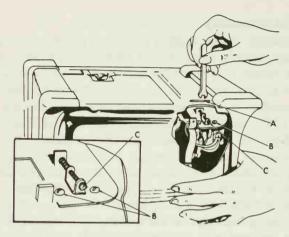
The time adjustment for this toaster is made by loosening two small screws (B) by one-half turn. Then, insert a 3/16-inch wrench into the opening (A), and engage the adjusting screw (C). Turn this screw toward the rear of the toaster for darker toast, toward the front for lighter toast. After the desired adjustment has been made, tighten screws (B), which will hold the adjustment-screw setting.
